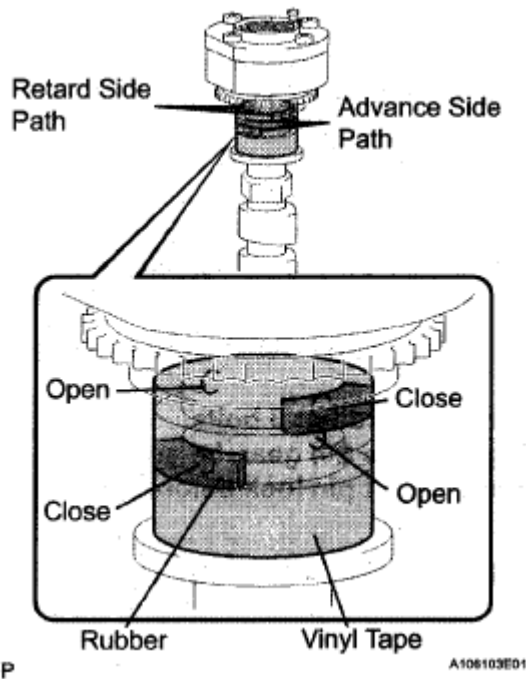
Covering Oil Paths Of Cam Journal With Vinyl Tape
